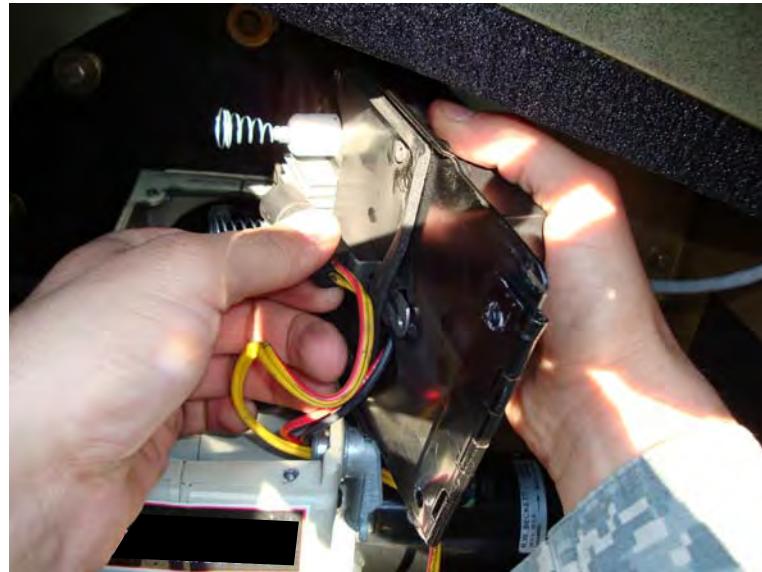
Reinstall Flame Sensor Assembly Bracket into Slot on Ignition Transformer.
